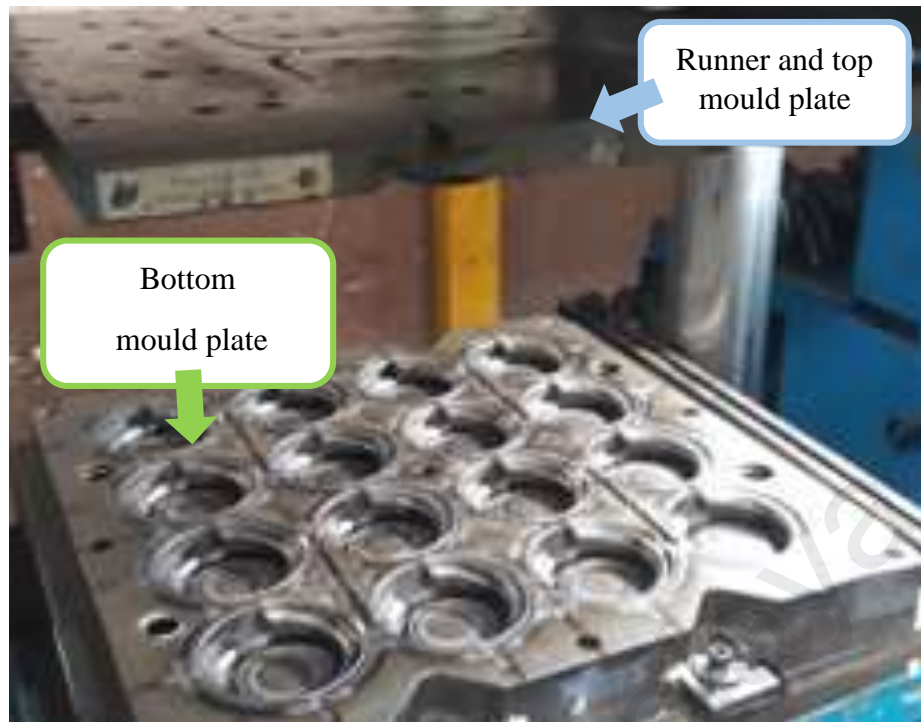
Experimental mould is a two plate mould with 16 cavities.
